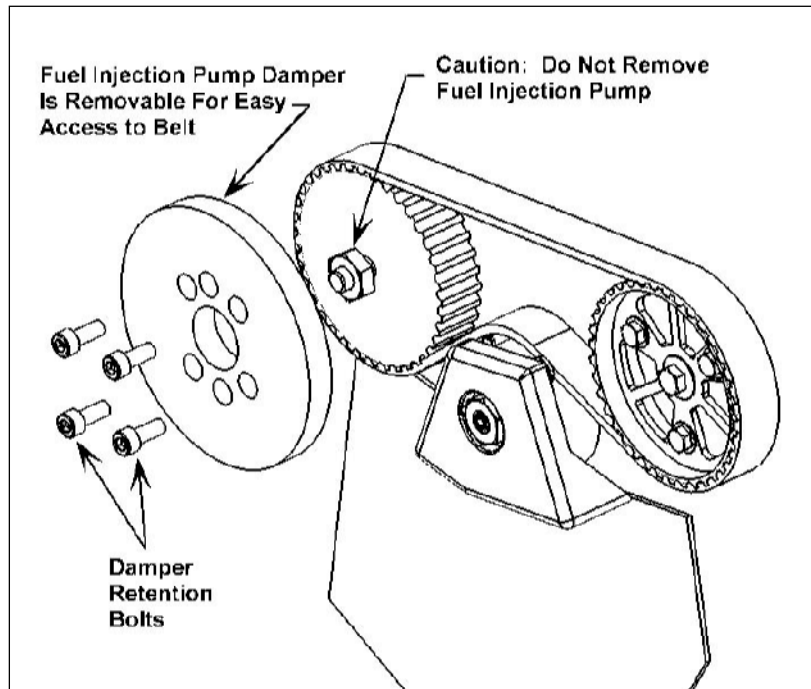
Fuel Injection Pump Damper Removal; Audi's Guideline
